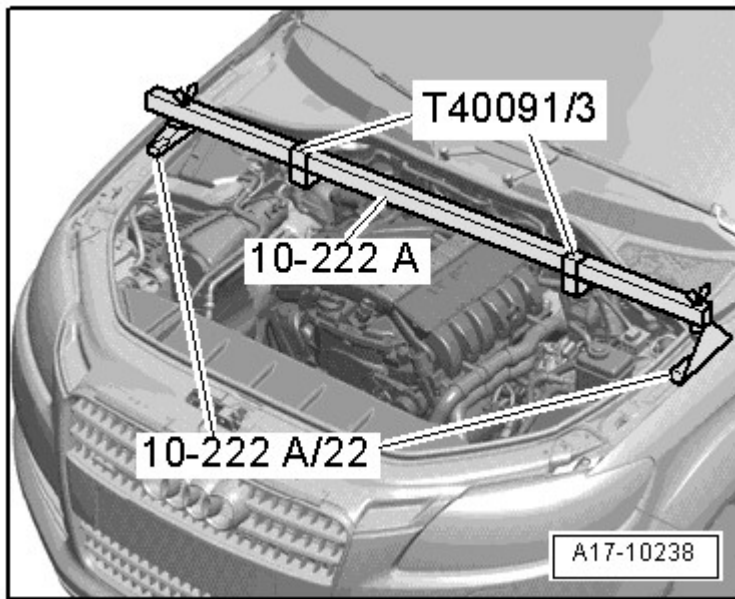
Mounting 10-222 A, 10-222 A /22 And T40091/3 On Fender Bolting Edges
